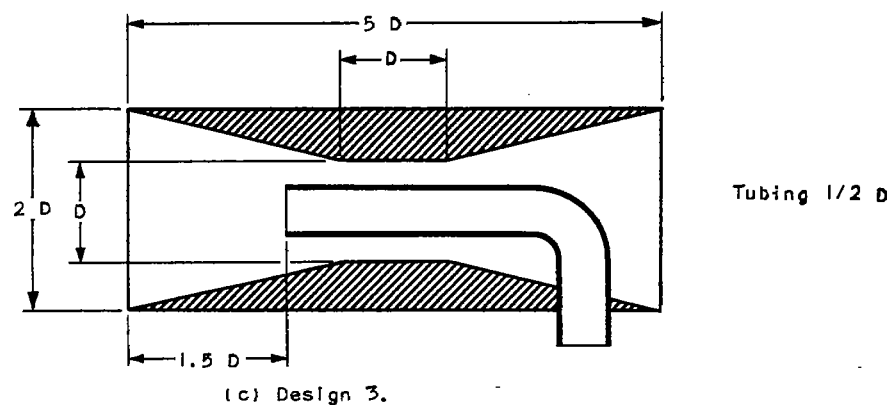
Designs of shrouded total-head tubes used in cooling investigations.
